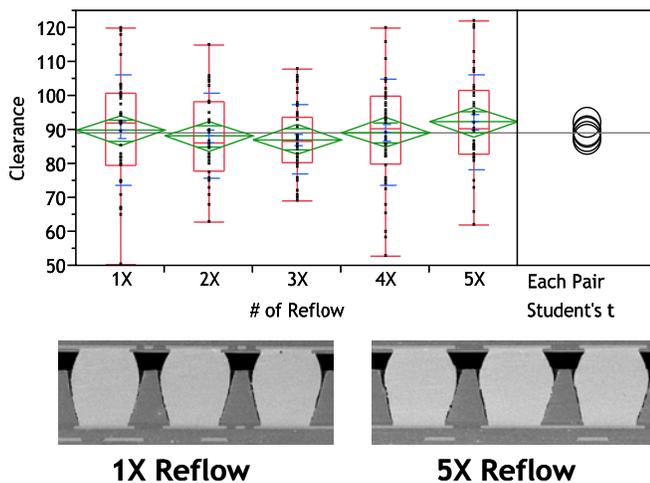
Package-to-Package gap based and solder joint shape vs. number of reflows
